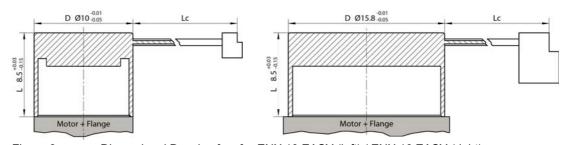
Dimensional Drawing [mm] – ENX 10 EASY (left) / ENX 16 EASY (right)
